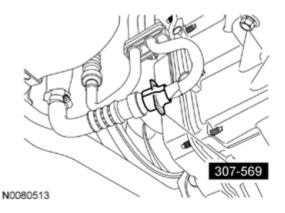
Disconnecting Transaxle Fluid Cooler Tubes Courtesy of FORD MOTOR CO.
